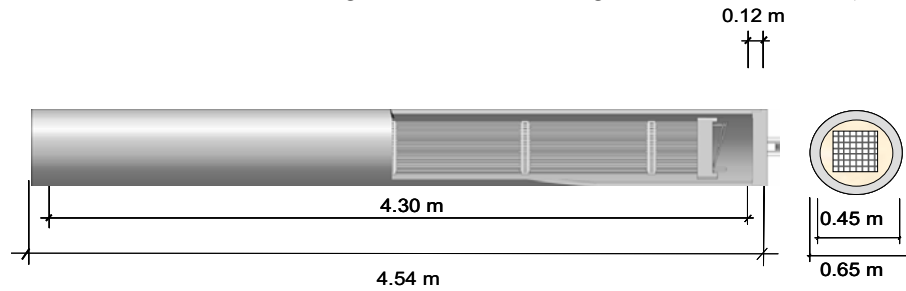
Scenario A2: HLW package for 1 MOX spent fuel assembly
